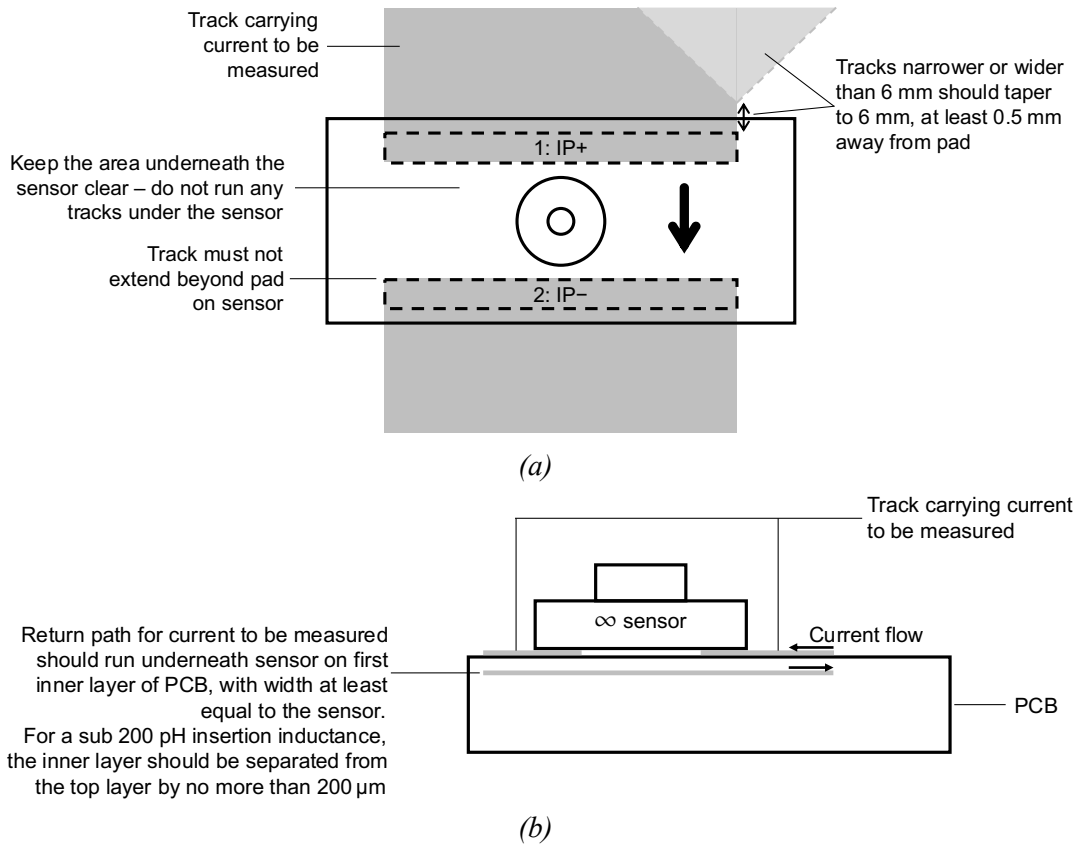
Circuit board layout guidelines – (a) top view, (b) side view
